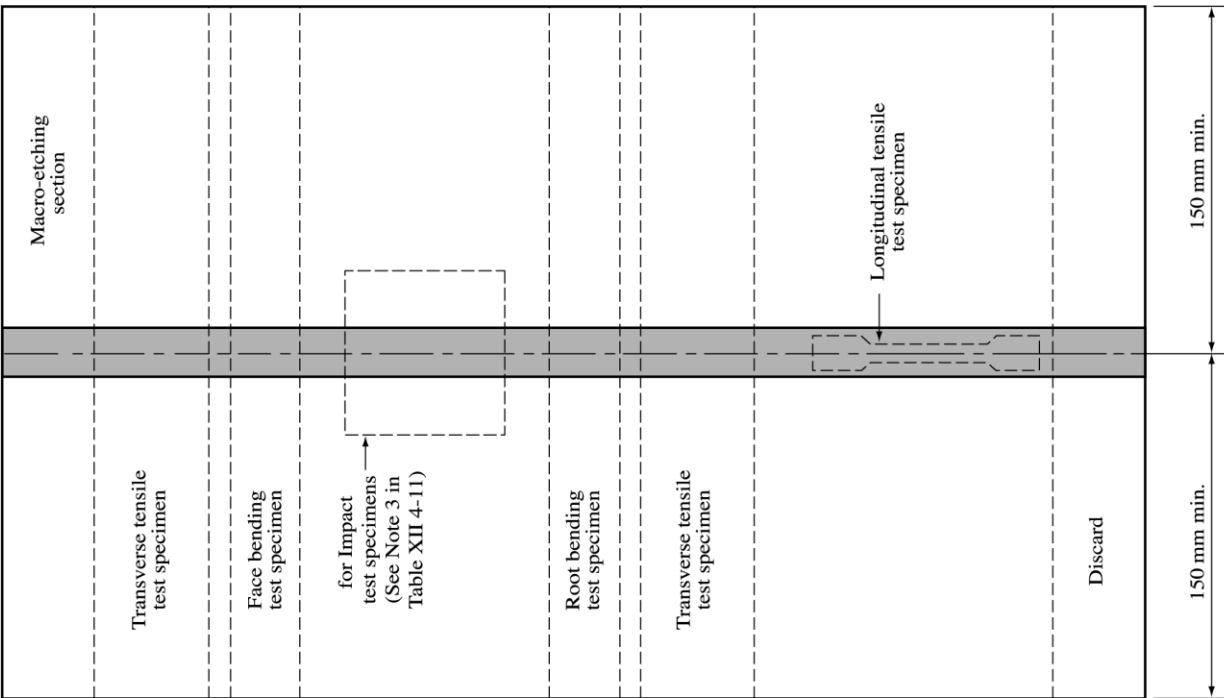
Butt Weld Test Assembly for One-side Welding Materials
